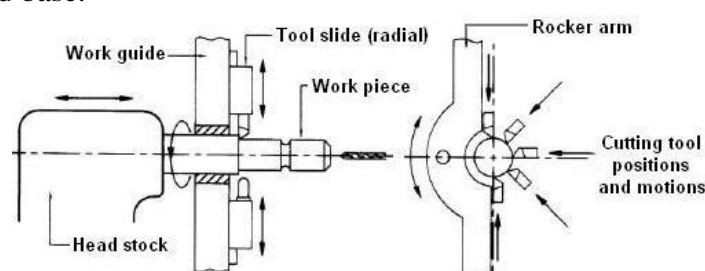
Working principle of the Swiss type automatic screw machine
